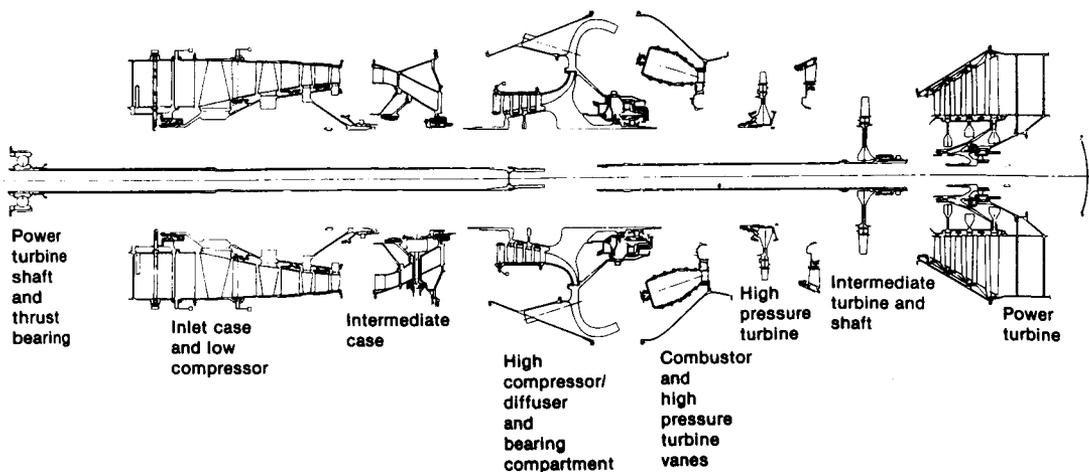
Turboshaft Engine Modules; "Free" Power Turbine (Three-Spool) Engine - The STS679 engine system is comprised of seven major modules. (J27638-71)
